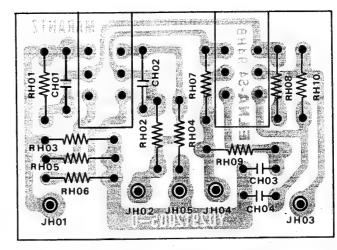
High and Low Filter Unit Assembly PHO1 Component Locations
